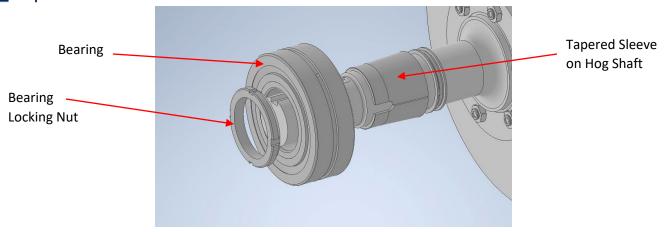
Bearing Nut, Bearing, and Tapered Sleeve
